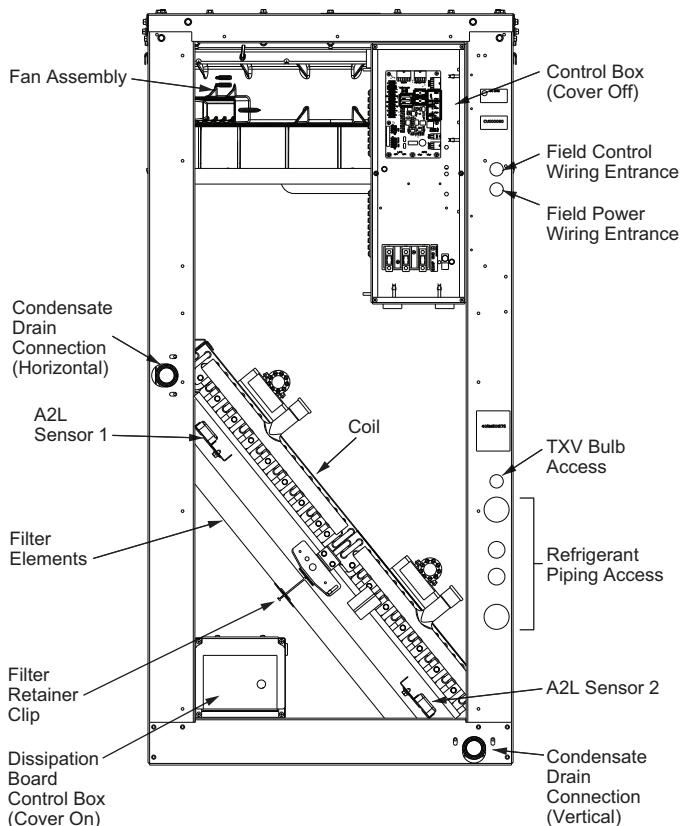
Wiring and Service Access (Side Panel Removed)
